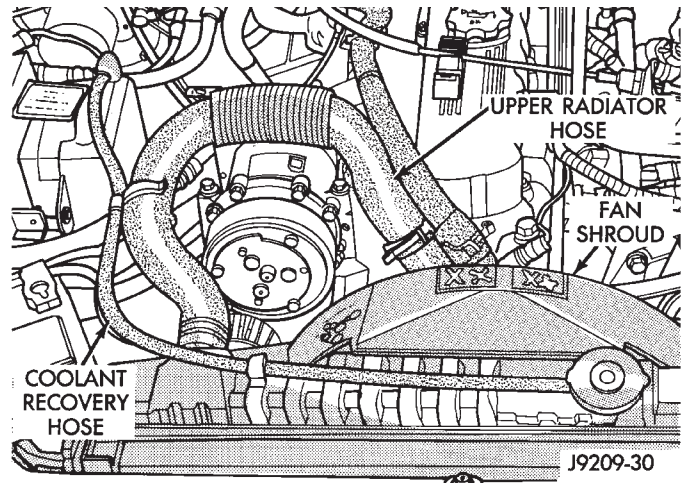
Upper Radiator Hose, Coolant Recovery Hose & Fan Shroud
